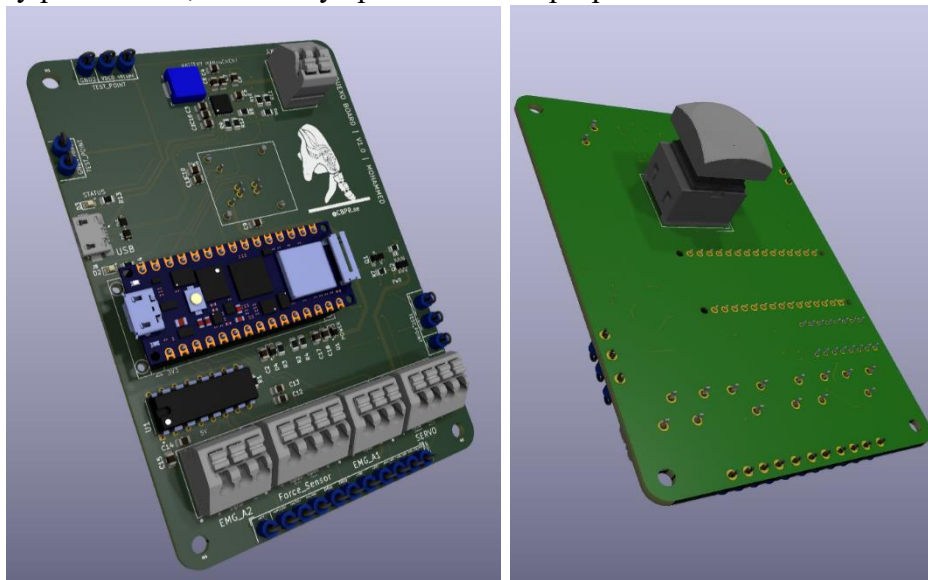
Front and Back View of the Classroom Exo PCB: An illustration showcasing the meticulously soldered components on both the front and back sides of the PCB.
